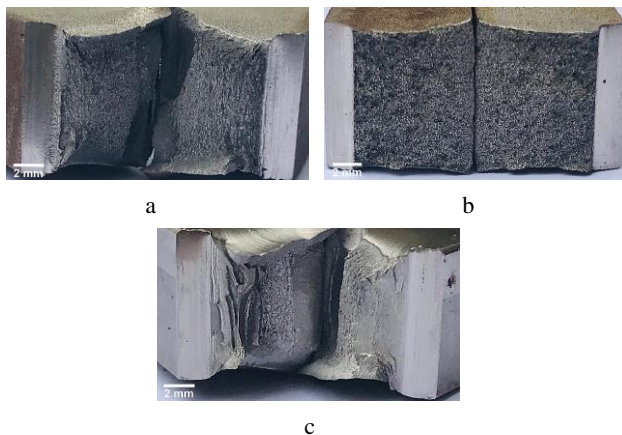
Fracture morphologies: a–LSLM-316L; b–HSLM-316L; c–TF-316L samples after impact tests
